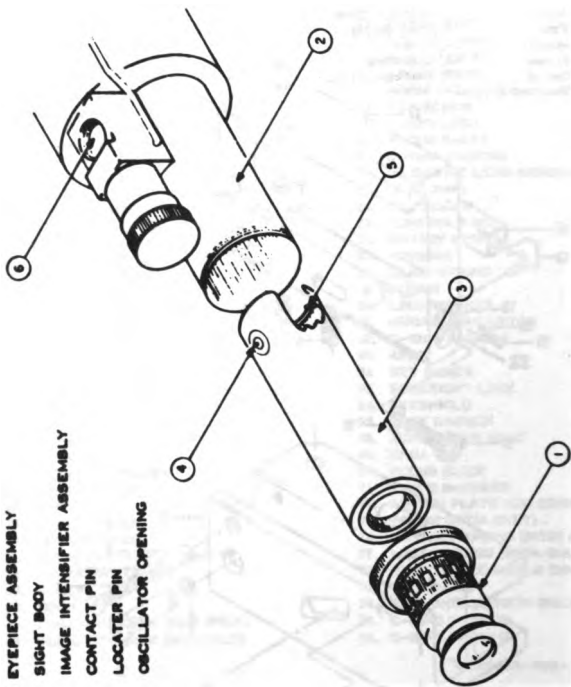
(2). Right, exploded view (part 2 of 2).
